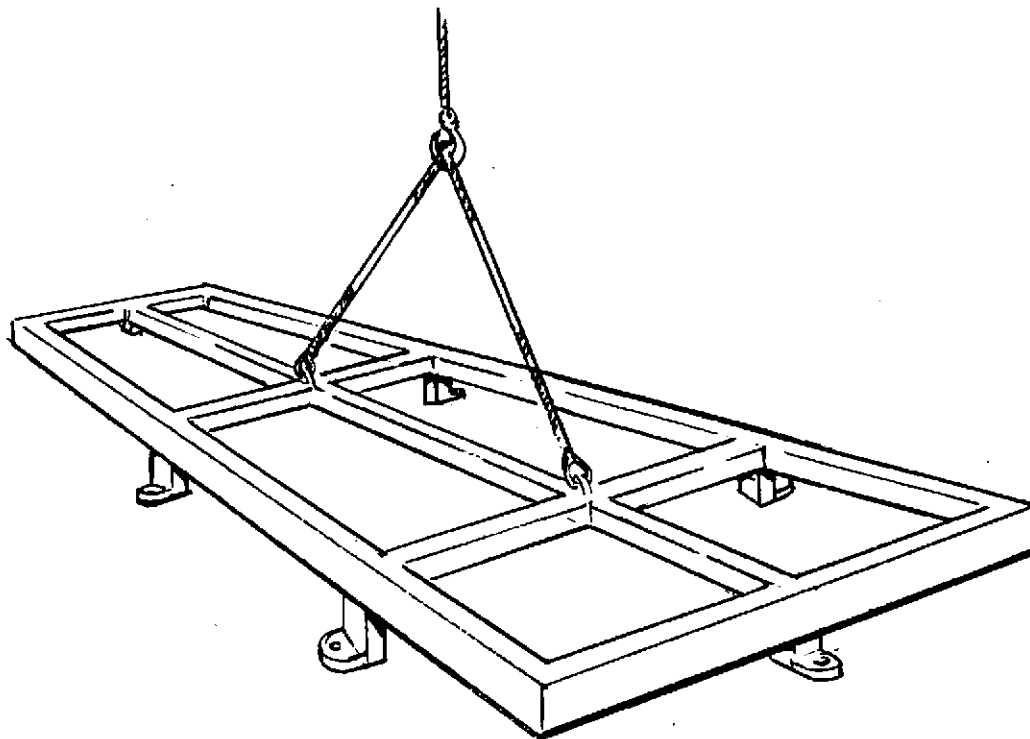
Hoist Handling Fixture HHF3 No. 1
